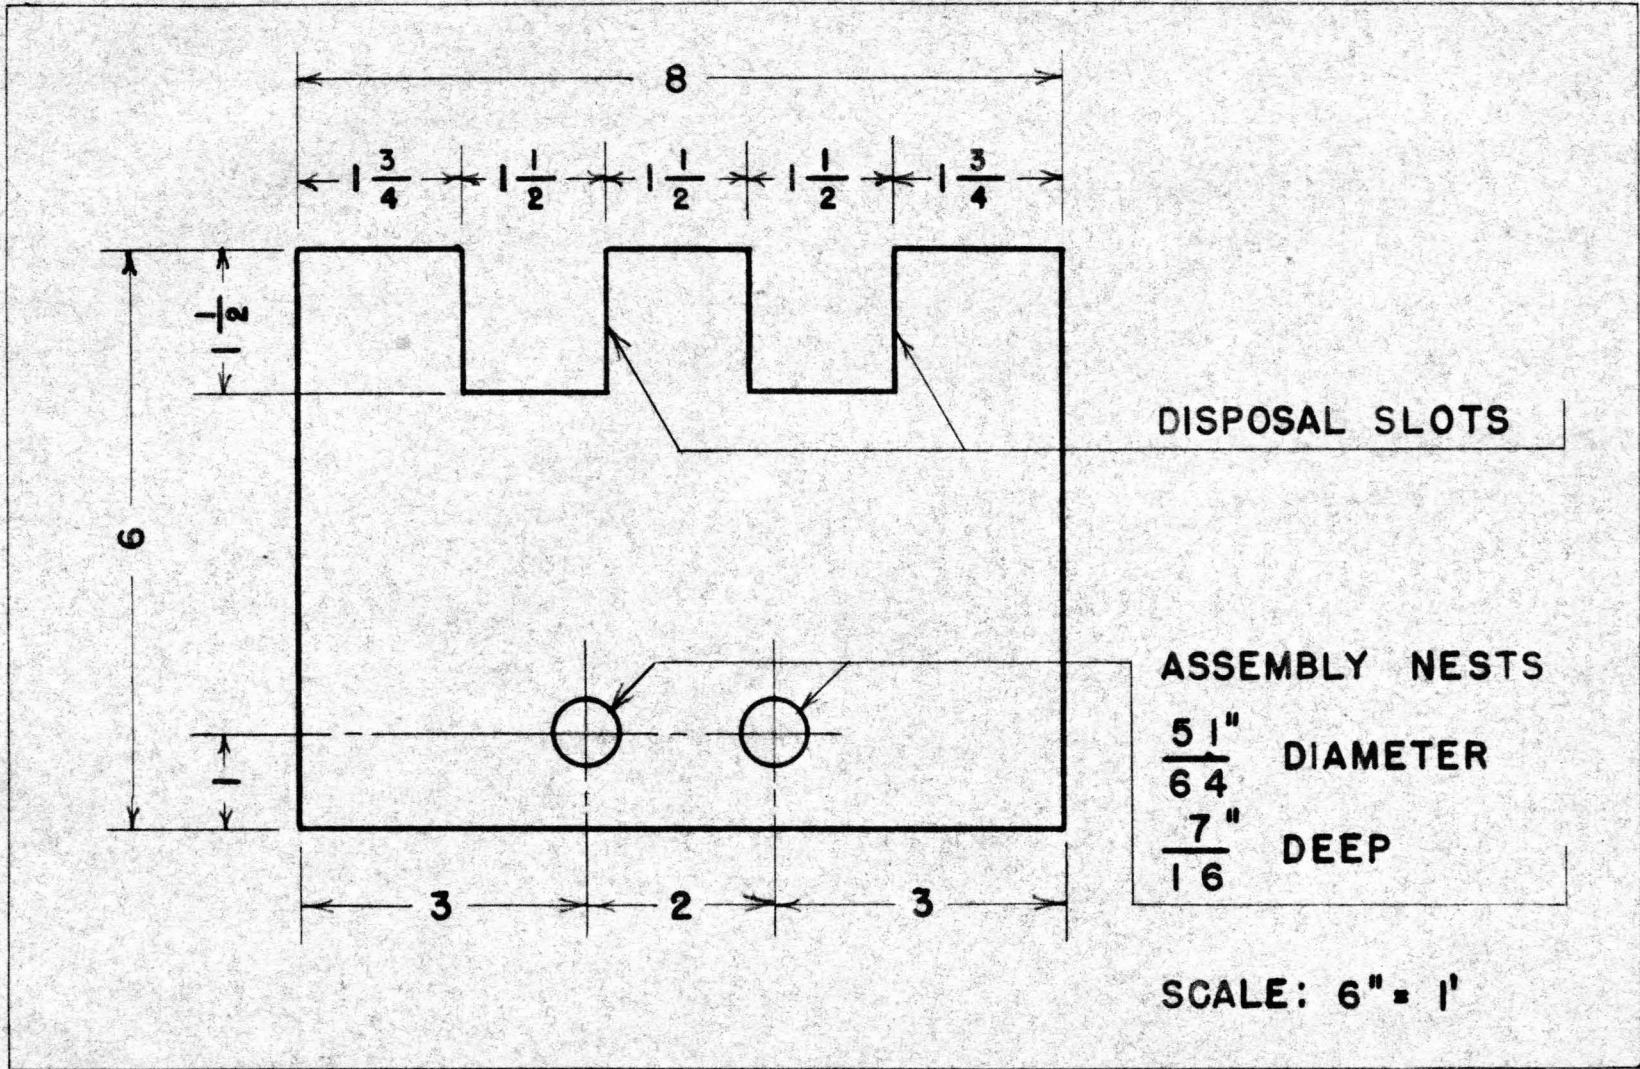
LAYOUT OF SYMMETRICAL ASSEMBLY FIXTURE.
